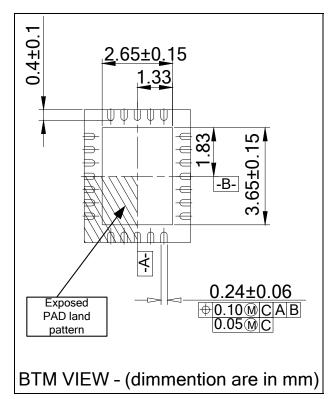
Recommended PCB Layout- Thermal Pad Footprint (CS)
